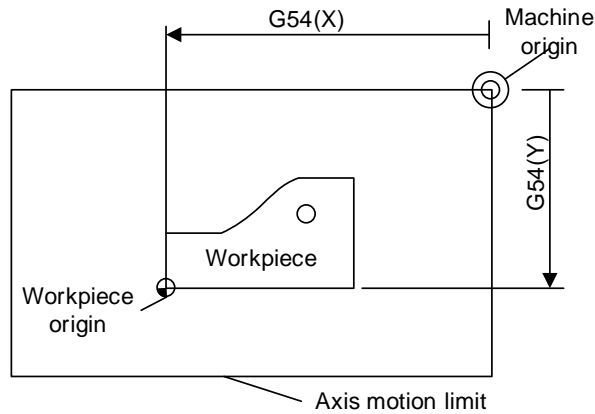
The relationship between workpiece offset and machine coordinate system
